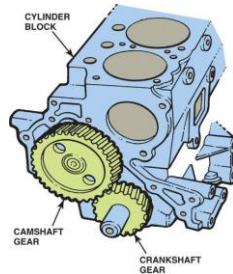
The larger camshaft gear is usually made from fiber and given a helical cut to help reduce noise. By making the camshaft gear twice as large as the crankshaft gear, the camshaft rotates one revolution for every two of the crankshaft.
